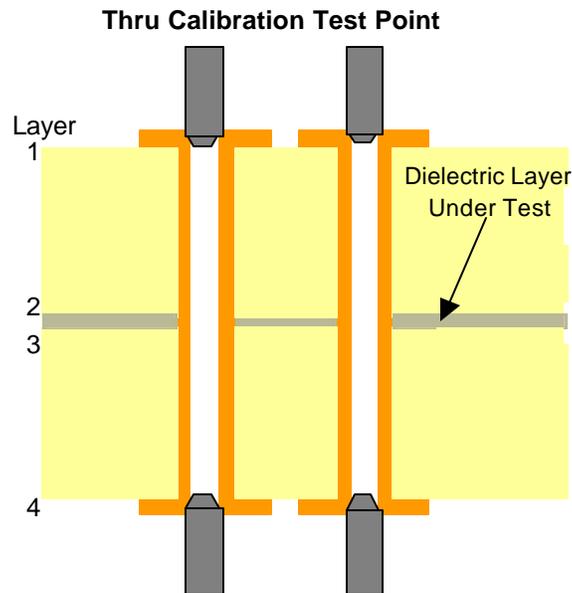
Cross-section view of modified FSR test board thru calibration test fixtures.
